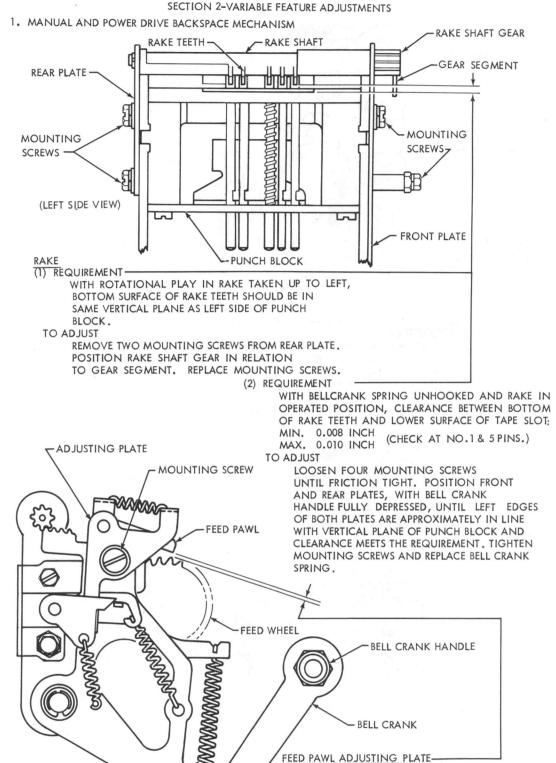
MANUAL BACKSPACE MECHANISM
